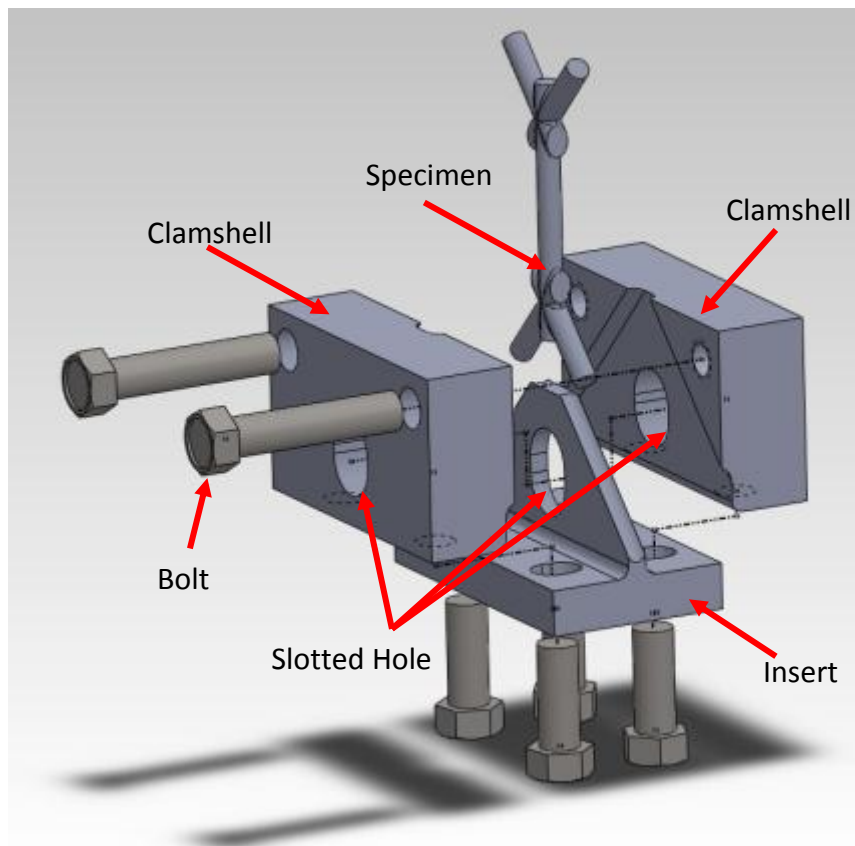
3D Exploded Model of Vertical Specimen Fixture
